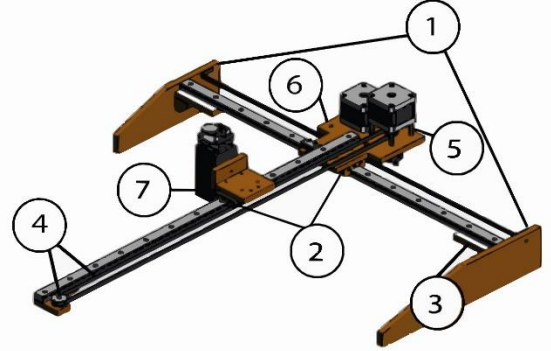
CNC machine assembly utilized in the laser cutting system.
